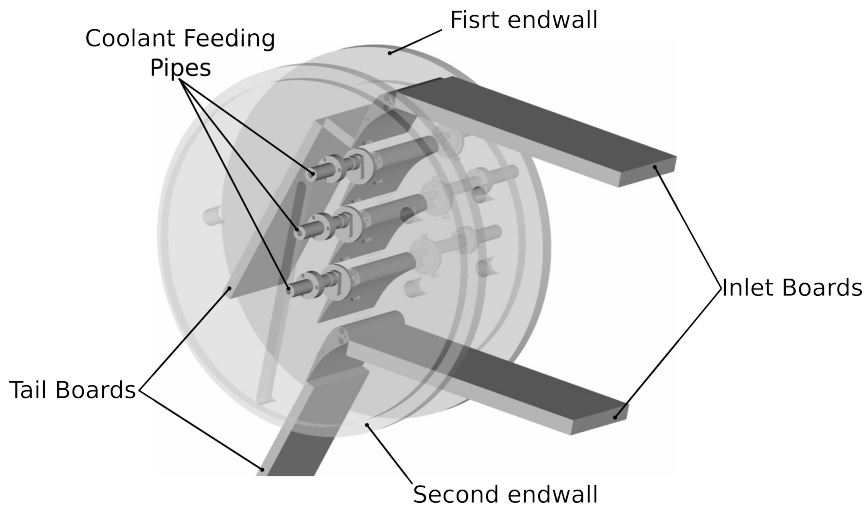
Complete assembly of the test section: coolant feeding pipes, inlet and outlet boards are all shown
